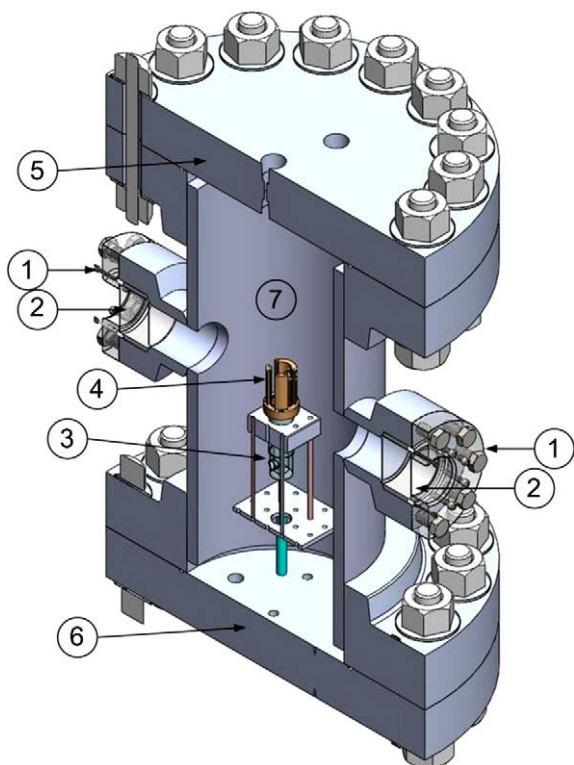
A cutaway view of the high-pressure chamber: (1) optical access ports; (2) quartz windows; (3) burner assembly; (4) chimney assembly; (5) upper flange housing the exhaust, safety valves, and pressure transducer; (6) Lower flange housing air, fuel pipes and wiring and (7) combustion chamber.
